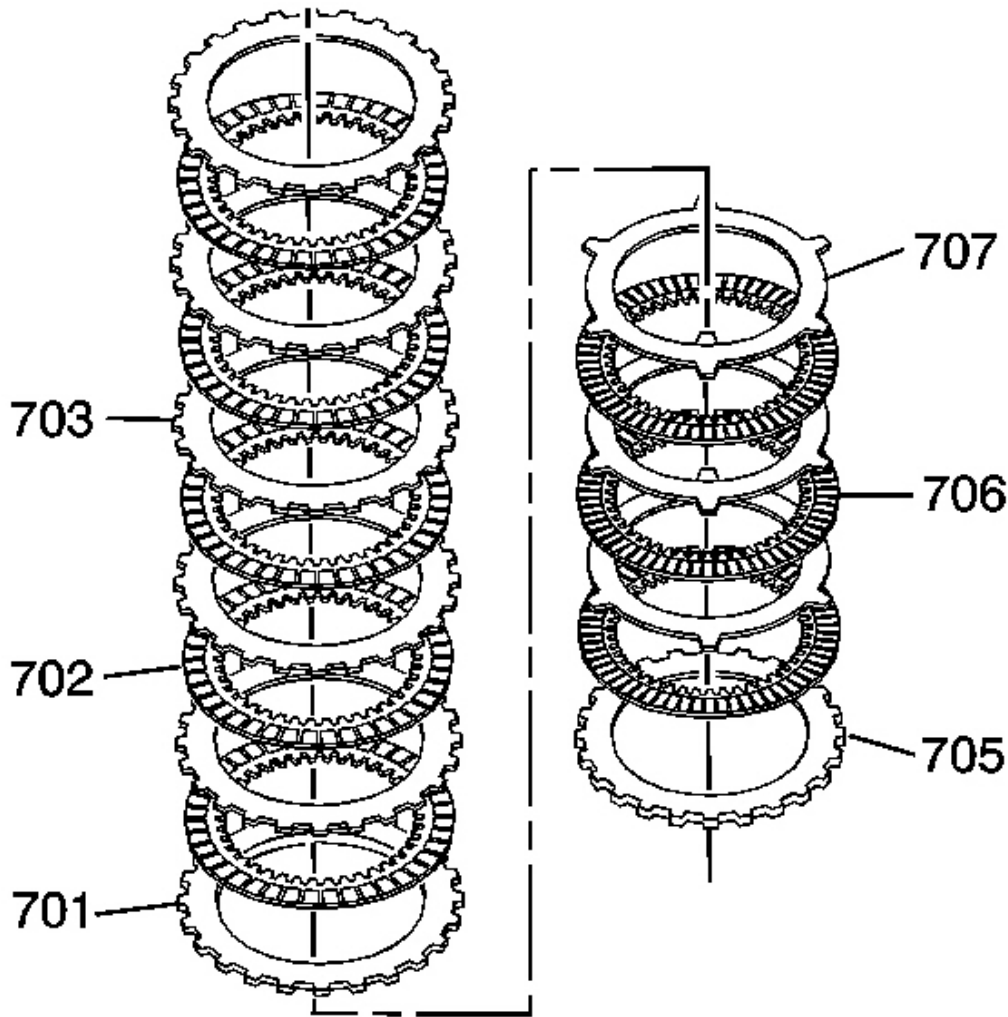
Inspecting Steel Clutch Plates, Clutch Fiber Plates & Clutch Backing Plates For Damage
